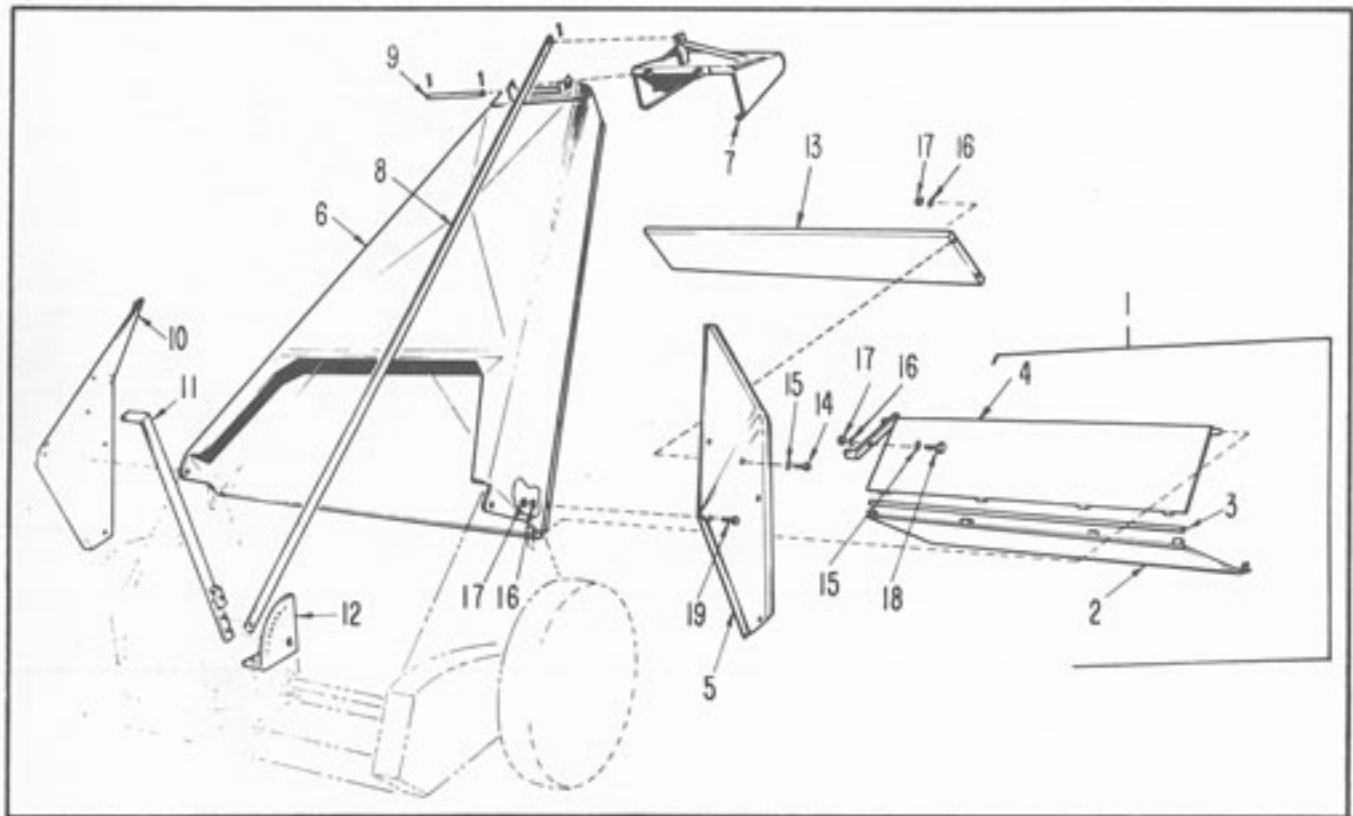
8032 - LOADING CHUTE ASSEMBLY KIT
